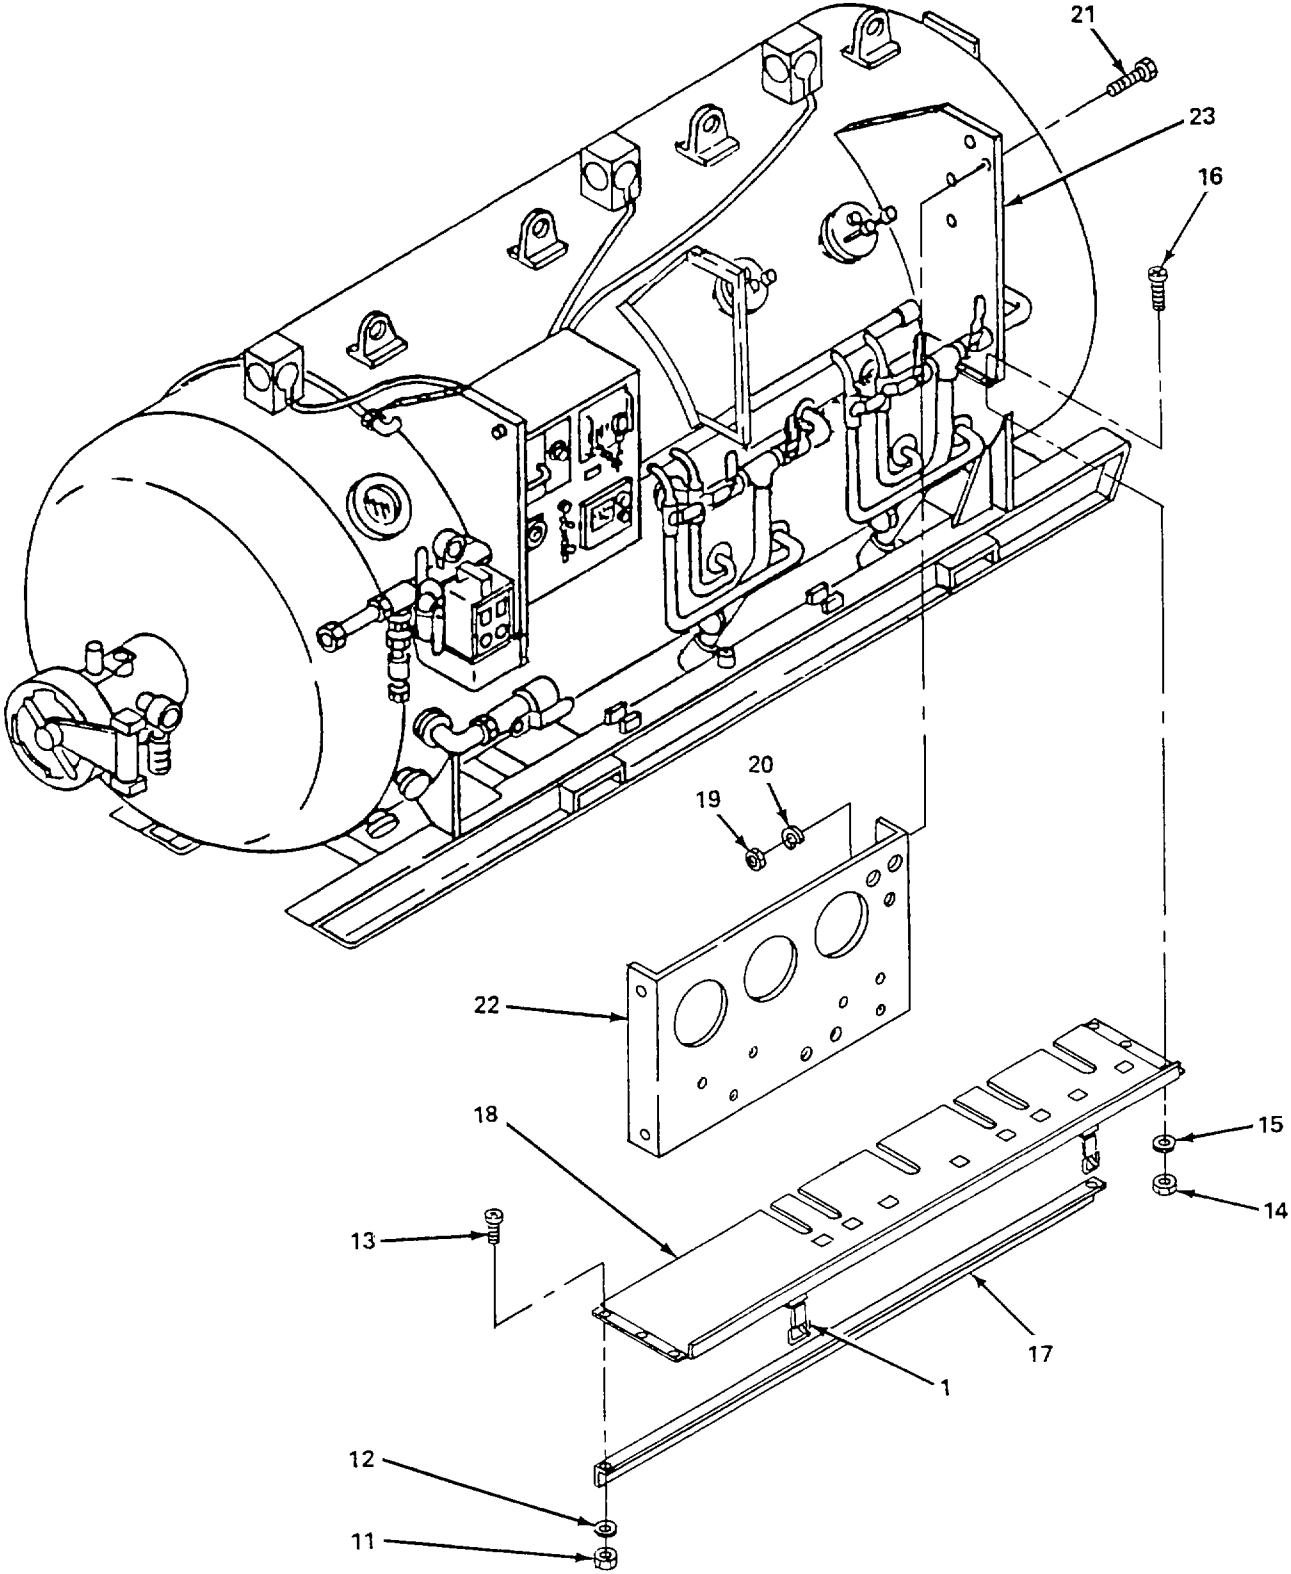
Chamber Instrument Panel and Hood Assembly Enclosure, Replace (Sheet 2 of 2).
